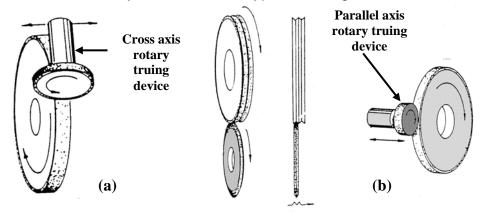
Rotary power truing wheel being used in (a) cross-axis (b) parallel-axis
